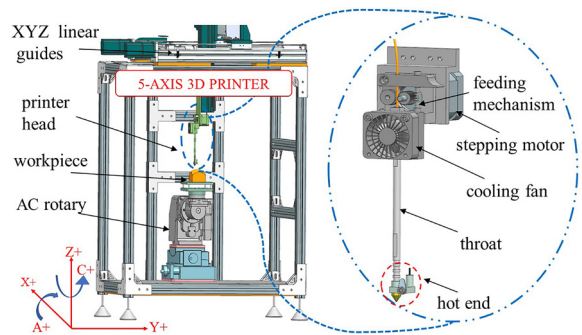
Concept design of our 5-axis FDM 3D printer with the throat-extended extruder
